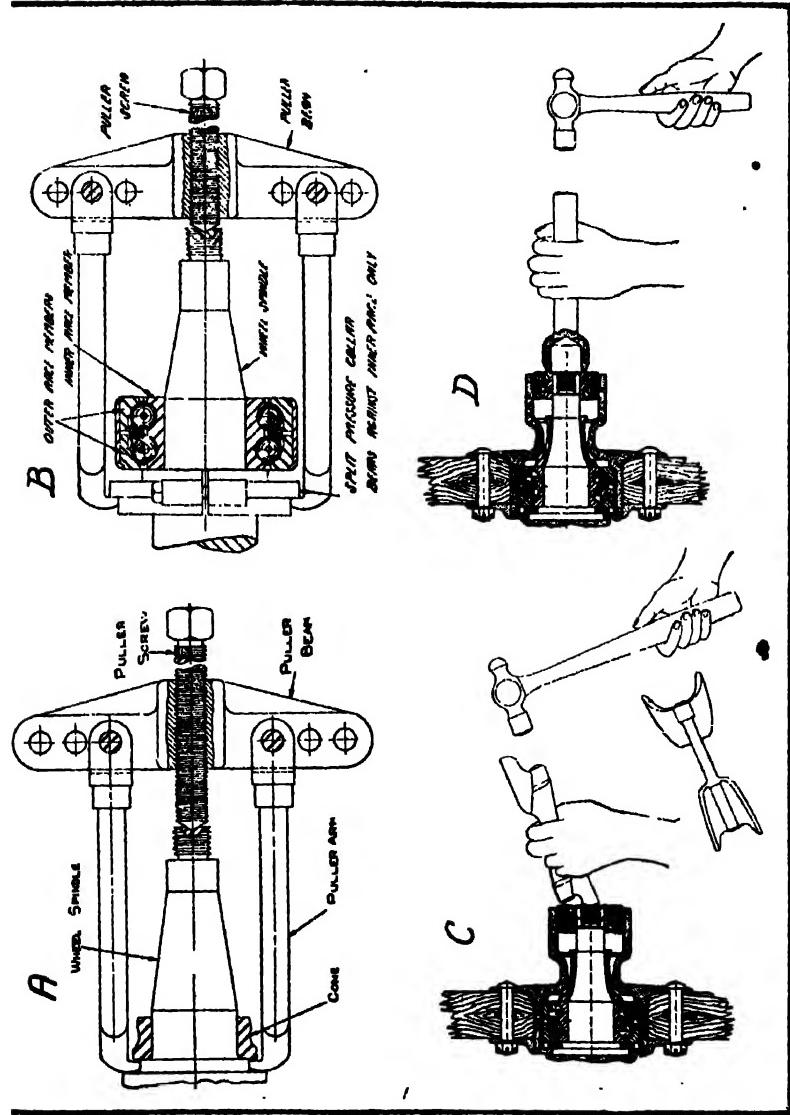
Methods of Removing and Installing Ball Bearings Without Damaging Them.
